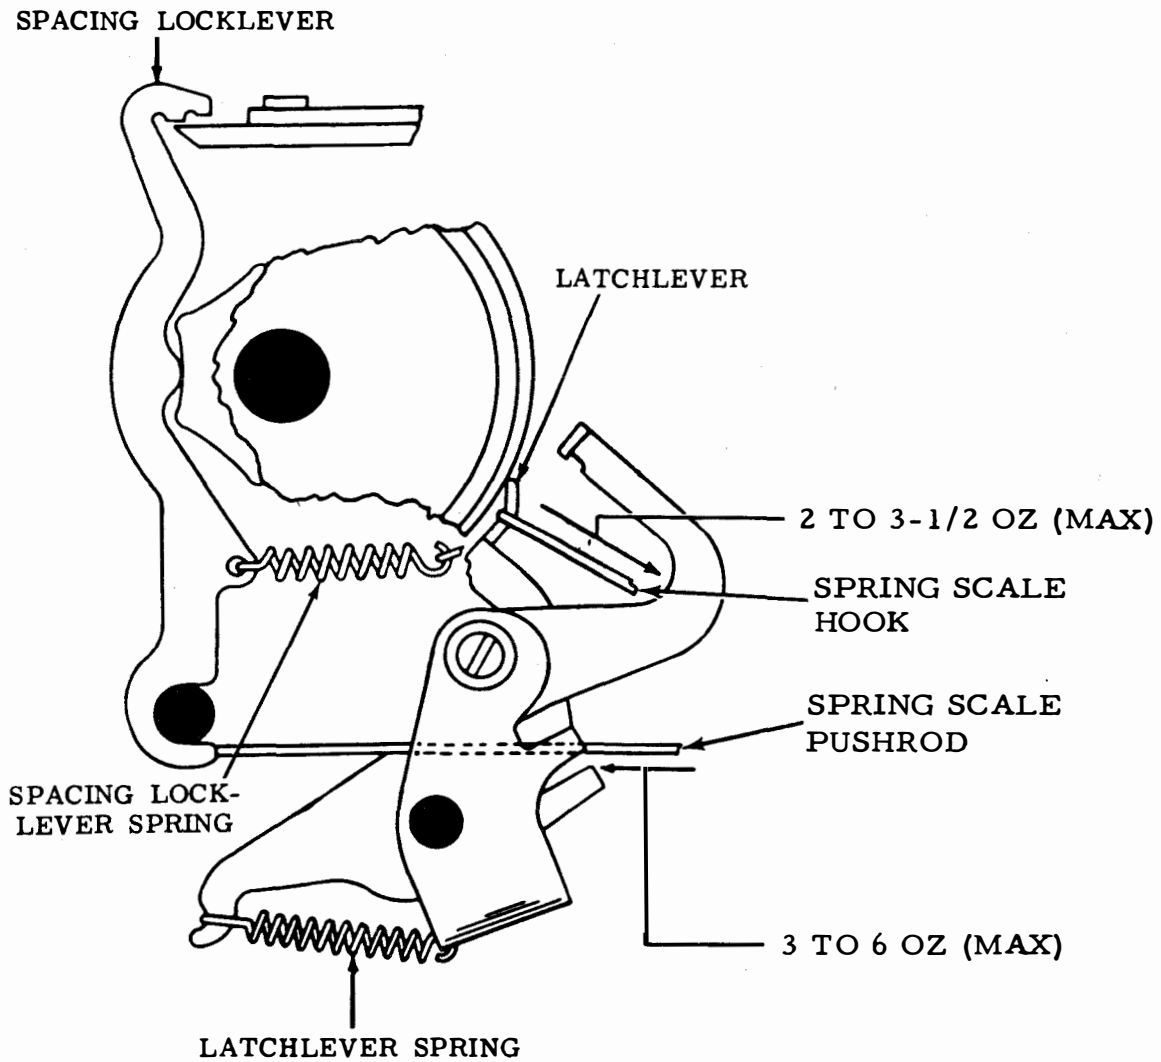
Selector Clutch Latchlever Spring and Spacing Locklever Spring, Front View
